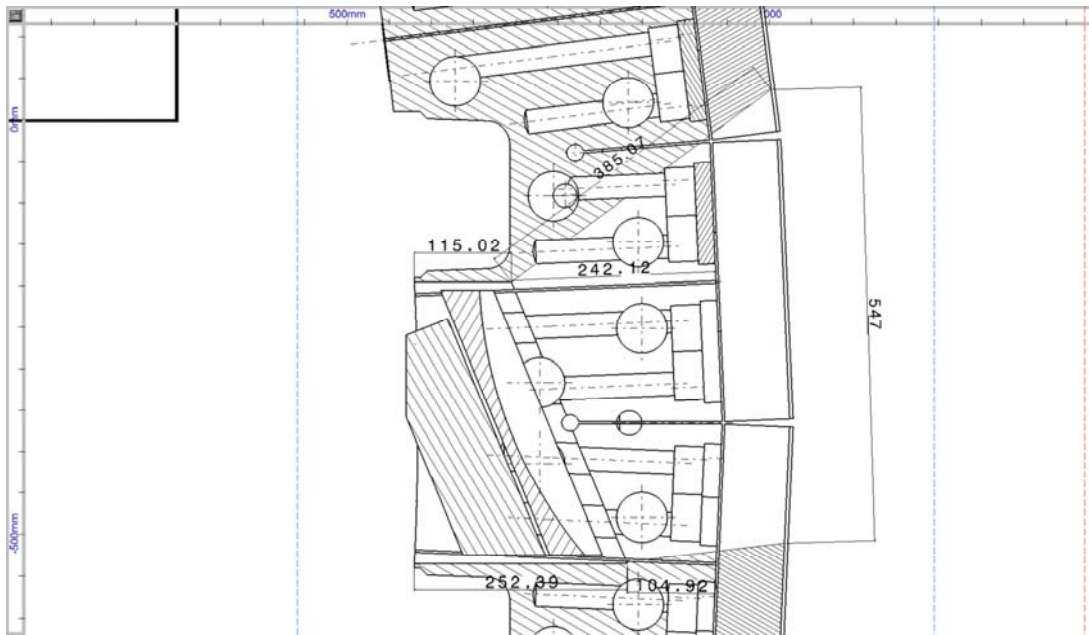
Top view of blanket: Sketch and dimensions of cut-out
